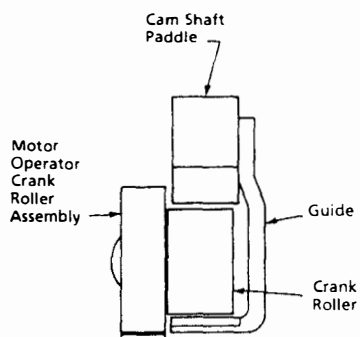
Engagement of the motor operator crank roller with the cam shaft paddle.
